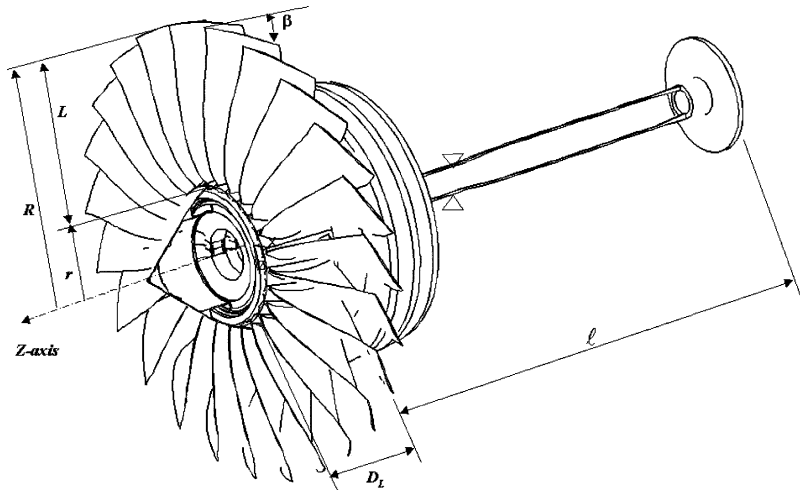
A typical fan rotor in a jet engine with hollow shaft: outside radius =  $r_o$ , inside radius =  $r_i$ .
